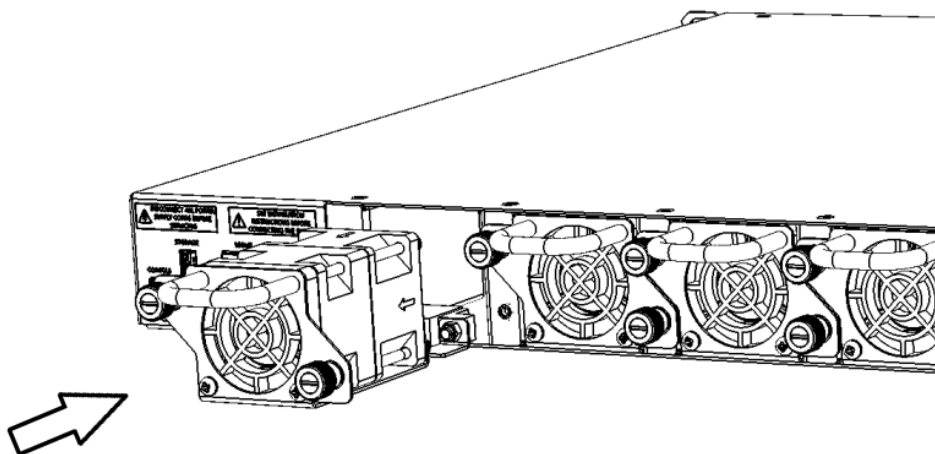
Inserting the Cooling Module in the DM4770 48VS+8CX and DM4770 32CX
